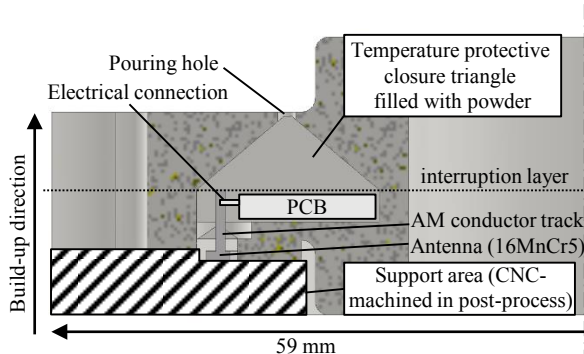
Sectional view through the cavity of the gear wheel during the build-up process.
